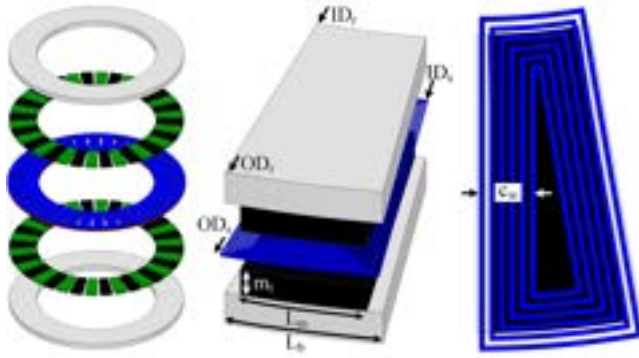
The exploded view of the machine configuration and the 3D FEA parametric model of one pole of the machine with the simplified PCB coil that was employed in the design optimization study.
